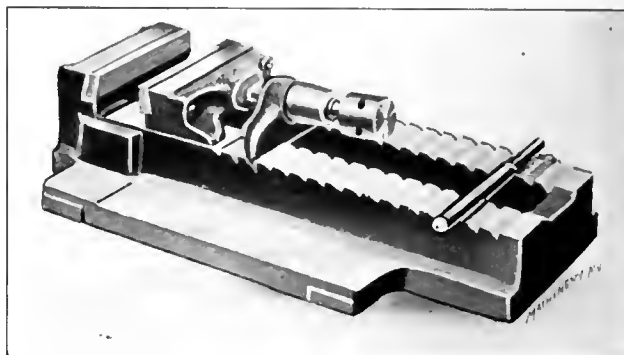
Taylor's Standard Pattern Machine Vise, with Adjusting Jaw Plates.
